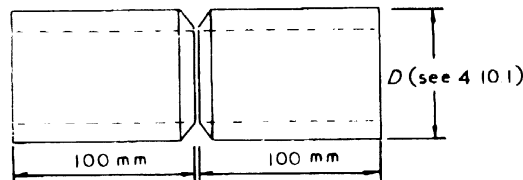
Test piece for butt weld in pipe (without backing)
